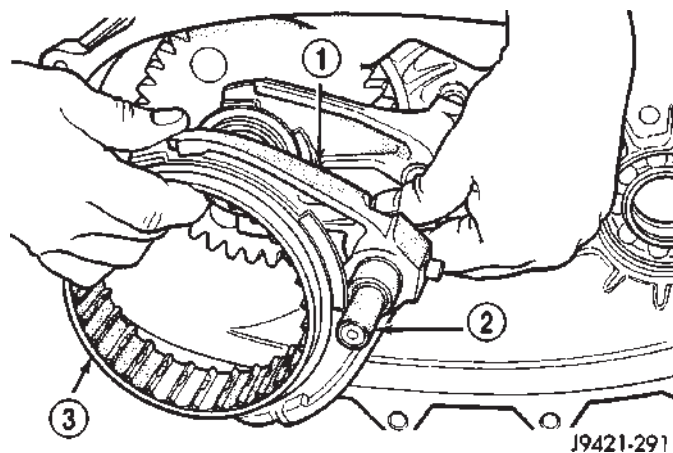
Mode Fork, Shift Rail And Sliding Clutch Removal
